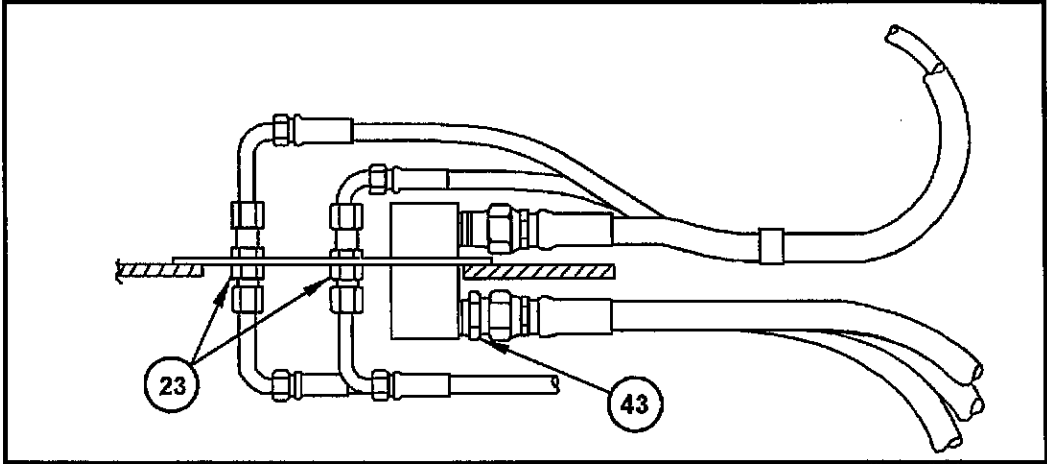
Steering Cylinder Assembly, p/n: 11171
